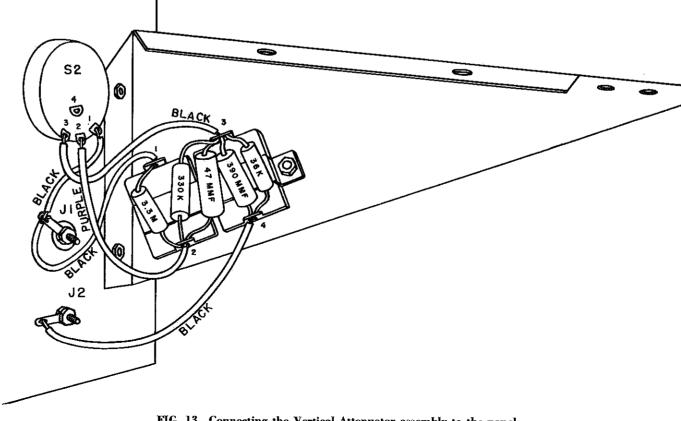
Connecting the Vertical Attenuator assembly to the panel.
